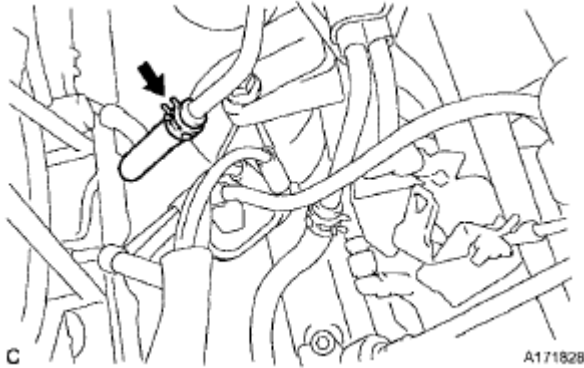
Locating No. 2 Oil Cooler Hose And Claws
